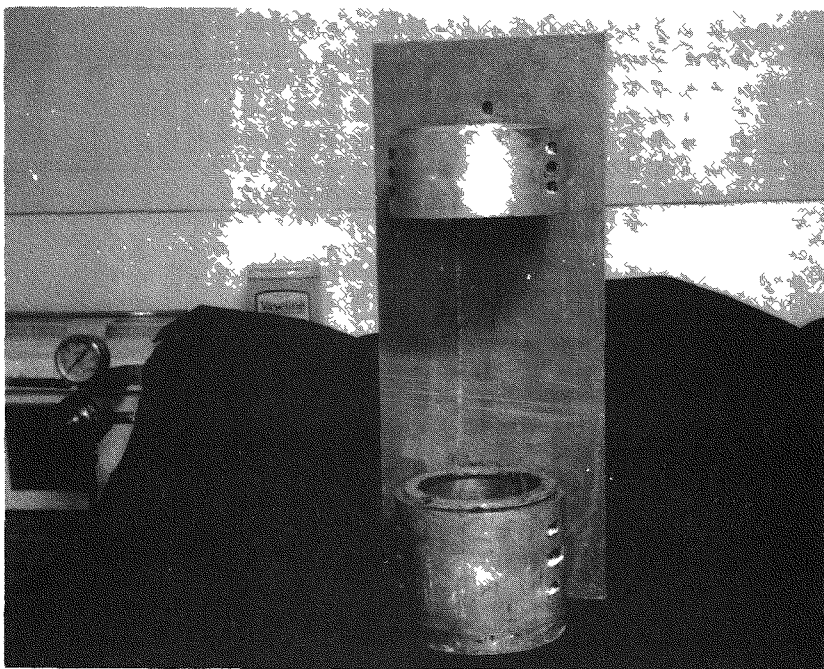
Aluminum Mold for Ceramic Hearth Castings (Assembled)
